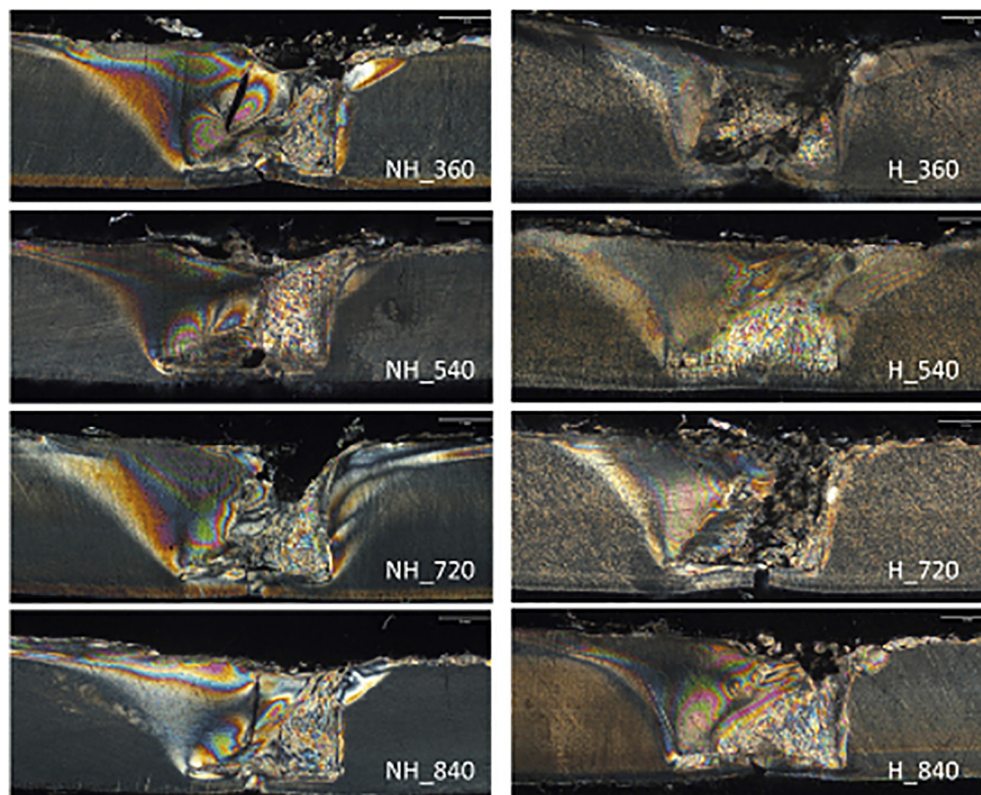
Weld cross-sectional micrographs under cross-polarised light for samples welded with assisted heating (H) or without heating (NH) [83].
